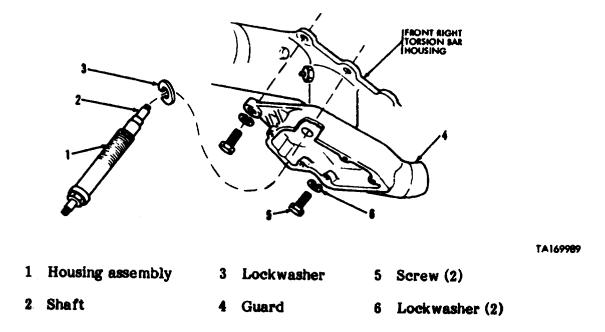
Removal or installation of front right torsion bar housing guard.
